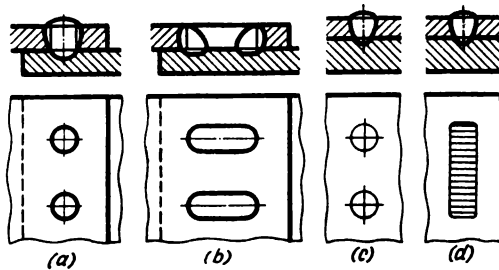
Slotted (a, b) and transfusion (c, d) welds
